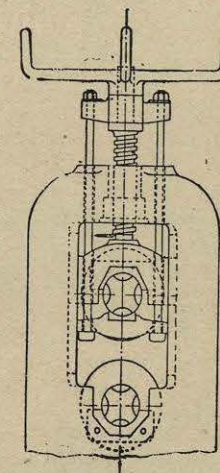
Method of supporting a Top Roll which needs to be adjusted during the process of rolling.
